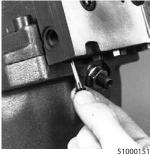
Remove PCOR Defeat Spool Stop Plug
